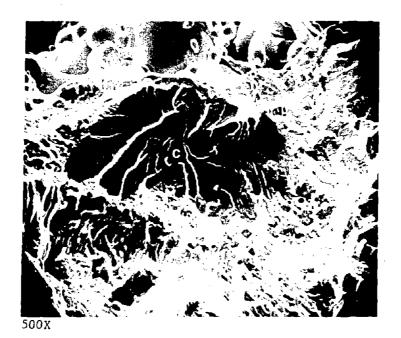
FRACTURE SURFACE OF SAMPLE 004 AT THE NOTCH TIP
